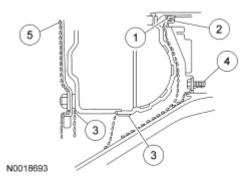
Locating Accessory Drive Belt Tensioner Bolts Courtesy of FORD MOTOR CO.
